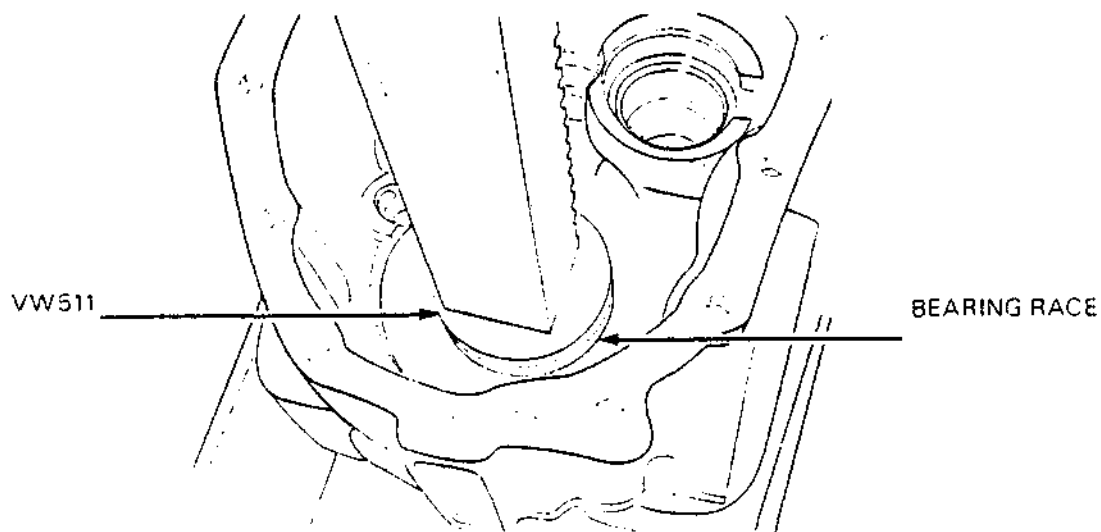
Installation of Pinion Bearing Race in Transmission Housing
